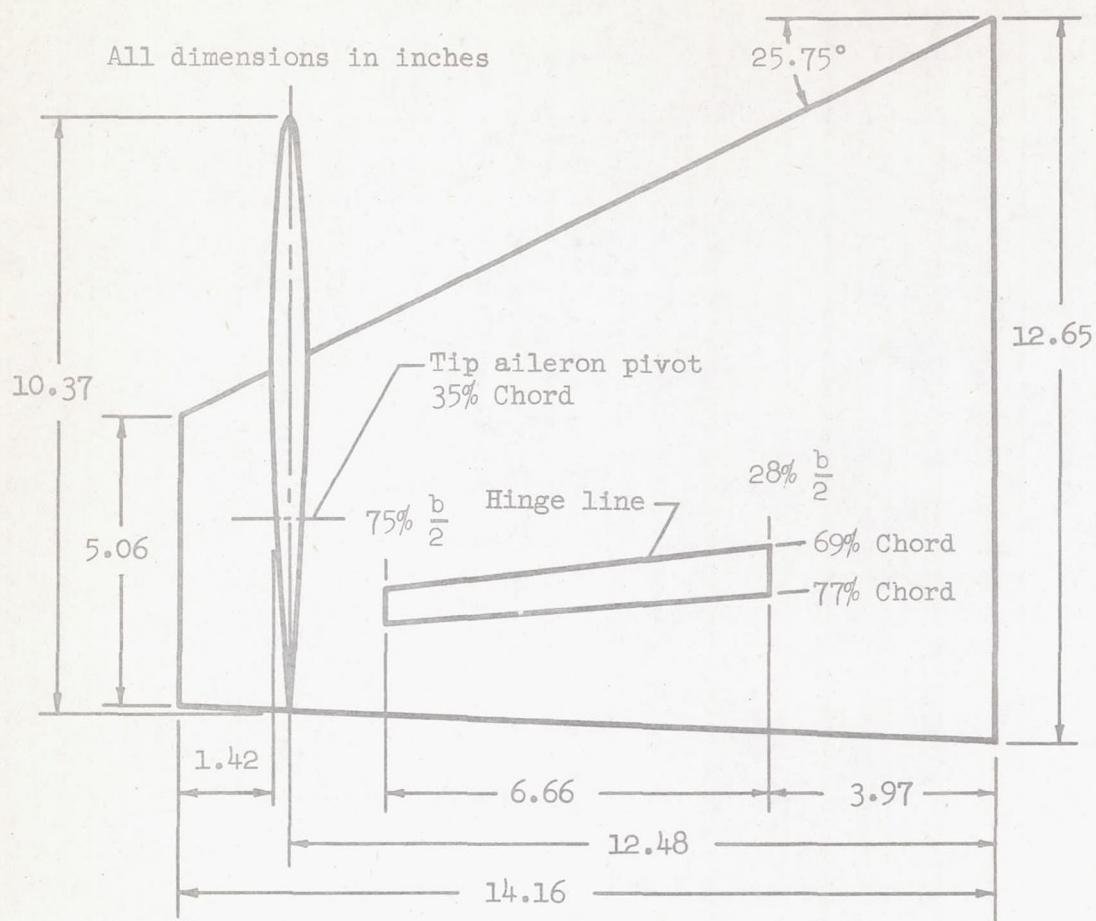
Detail sketch of the tip aileron and plain spoiler.
